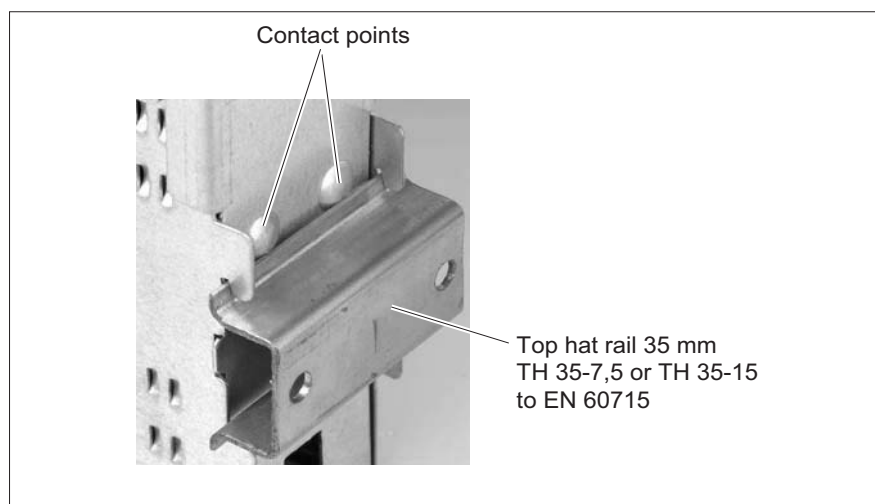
Contact points of the VT-HNC100...3X/S... for assembly on top hat rail
